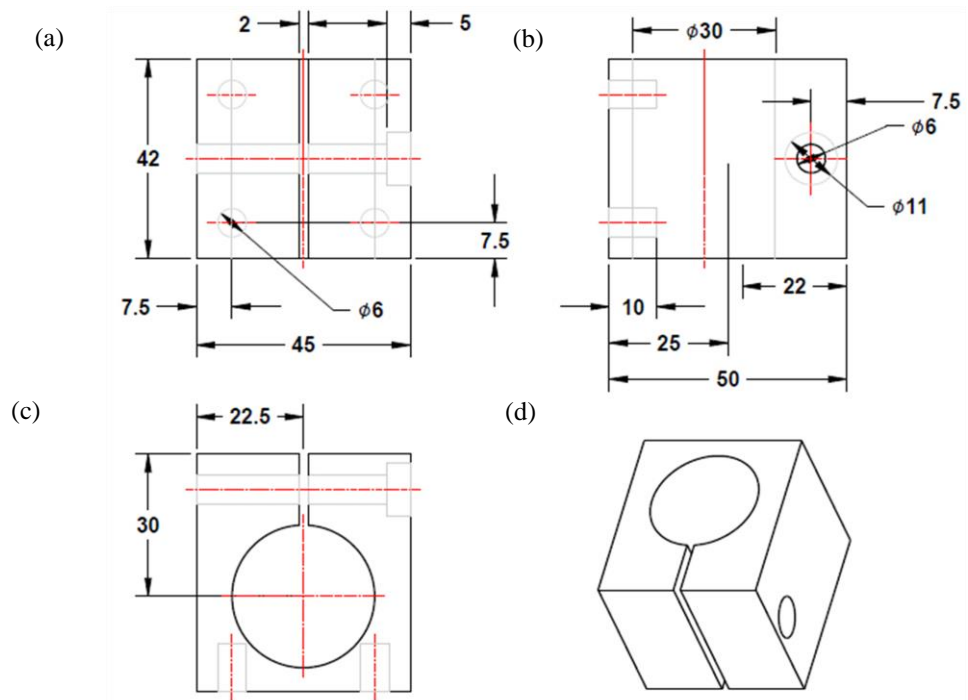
2D drawing of the (a) projected front view, (b) projected side view, (c) projected top view, and (d) three-dimensional CAD model of the slider for the height adjustment system (all dimensions in mm).
